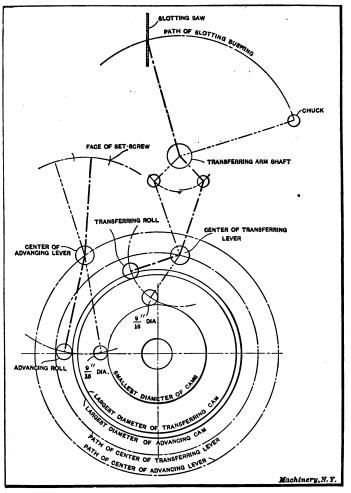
Diagram used in laying out Transferring and Advancing Cams for the No. 0 Brown & Sharpe Automatic Screw Machine
